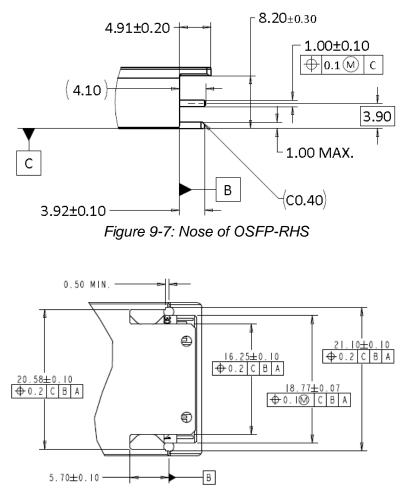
Paddle card position (bottom view of module) and module nose width
